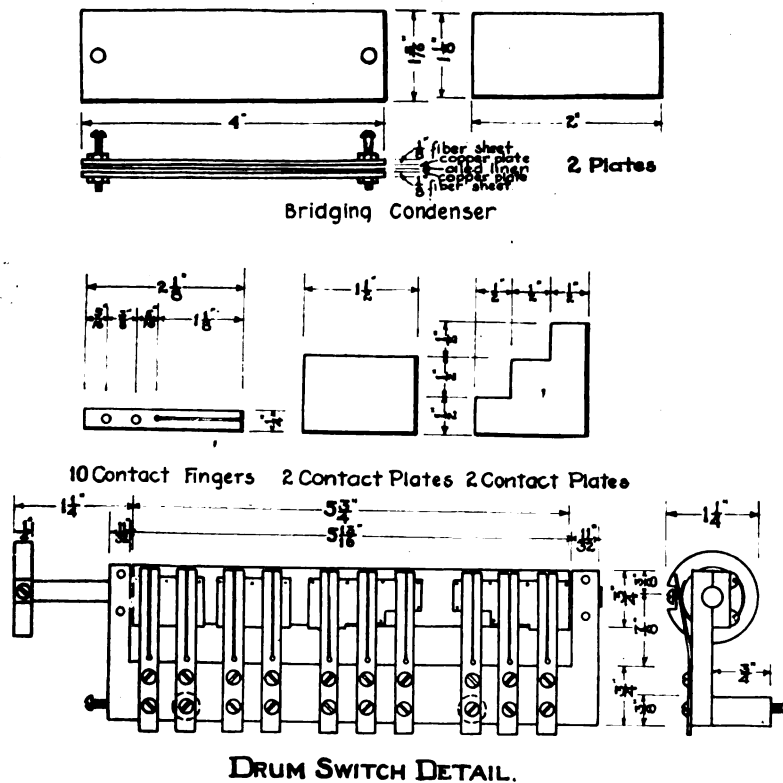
Detailed constructional plans of the bridging condenser and the drum switch
